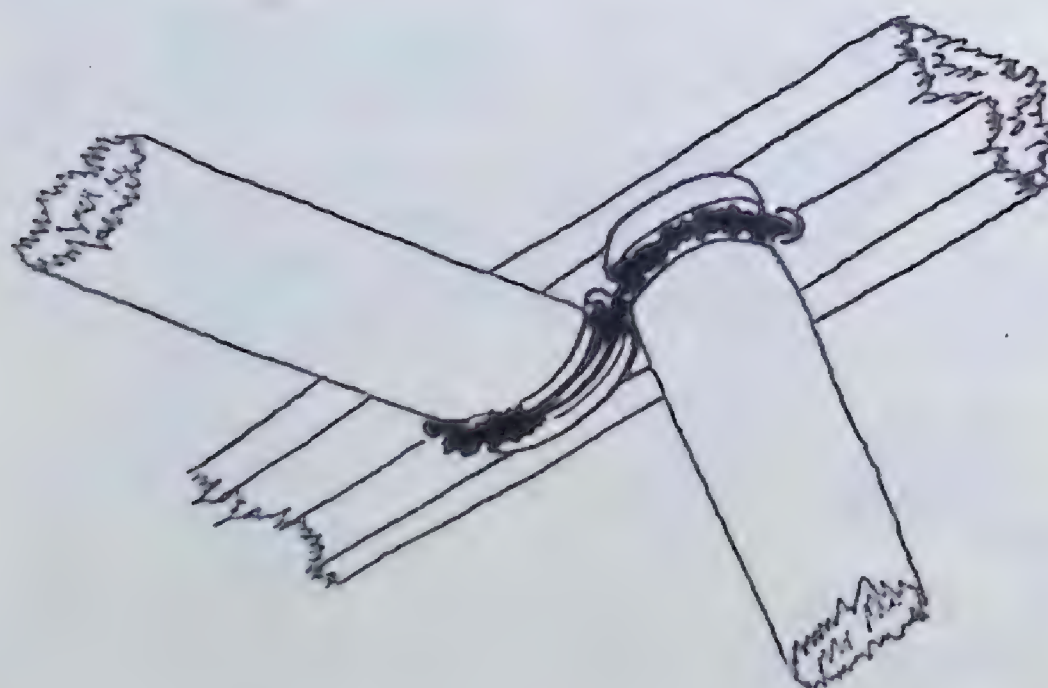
Lashing of additional rib and floor to bilge stringer
